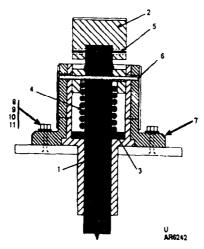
TOOL KIT, AMMUNITION: KIT #1 AND KIT #2 (DEFUZING DEVICE REPAIR PARTS FOR DISARMING ASSEMBLY)
